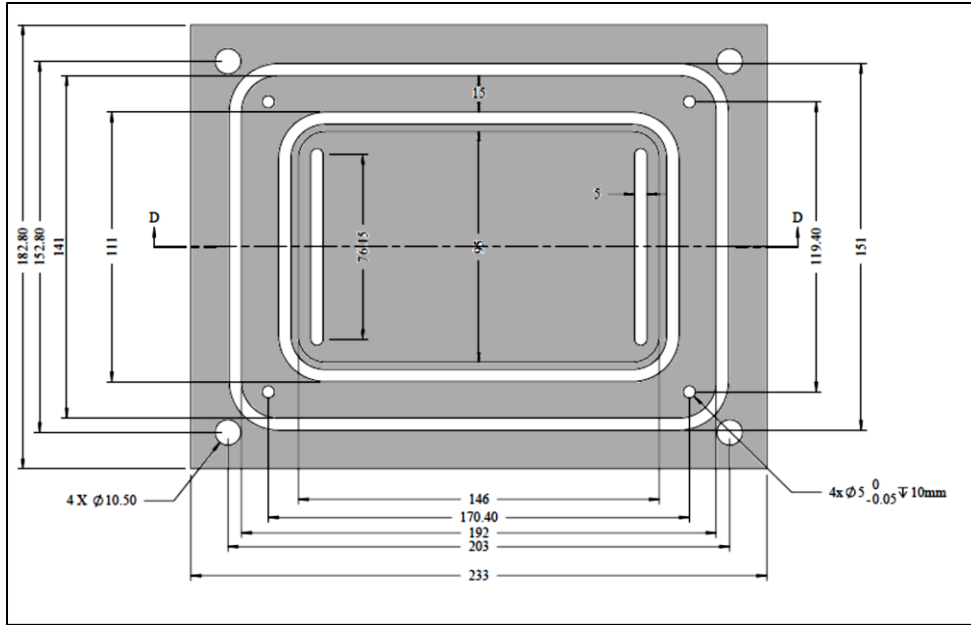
The MD compartment dimensions from the inside in millimeters [144].
